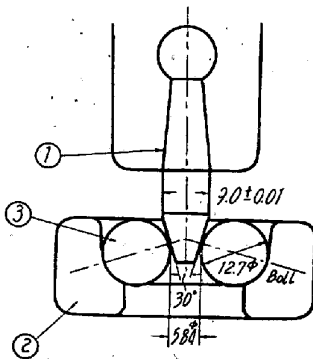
Principal part of the rolling fatigue test machine (By courtesy of the Toyo Bearing Mfg. Co. Ltd.).
